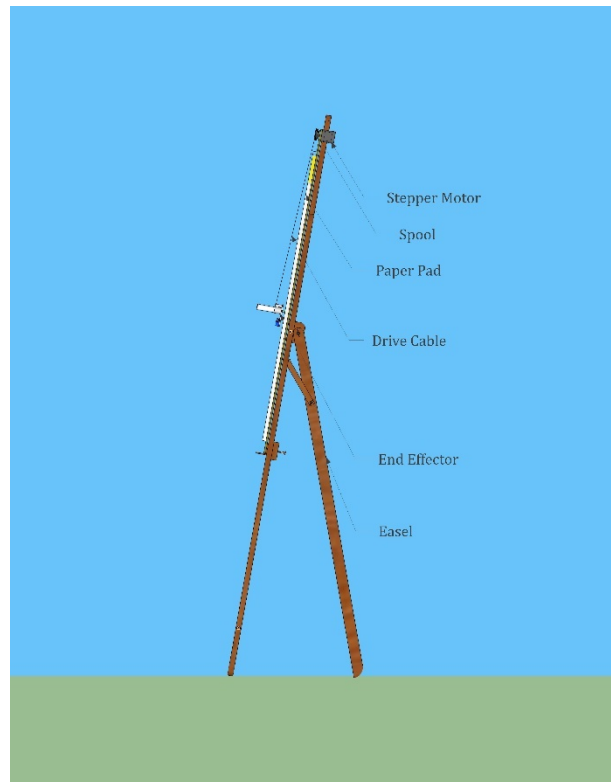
Side View of Mechanical Assembly [5] [6] [7]
